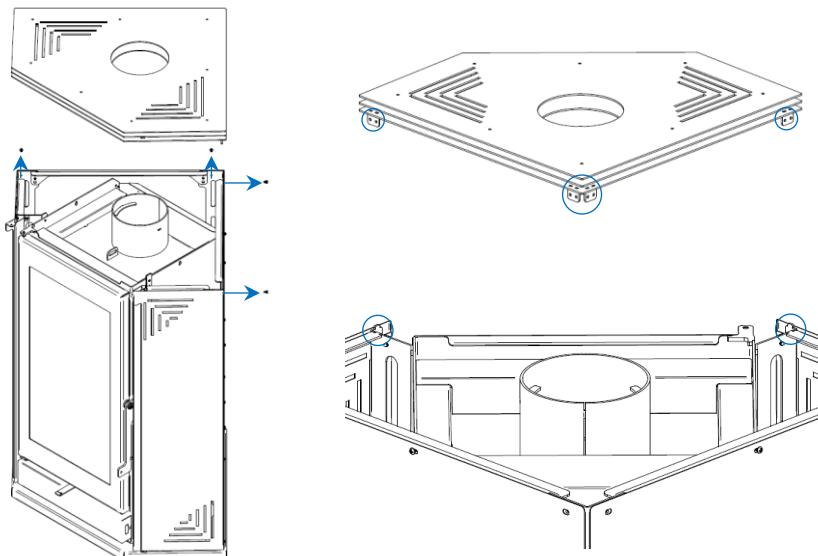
Remove the sheet metal top from the K4 Eco stove
